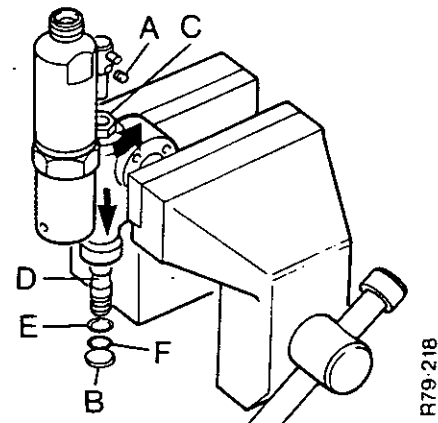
DISASSEMBLY OF THE CONTROL VALVE
